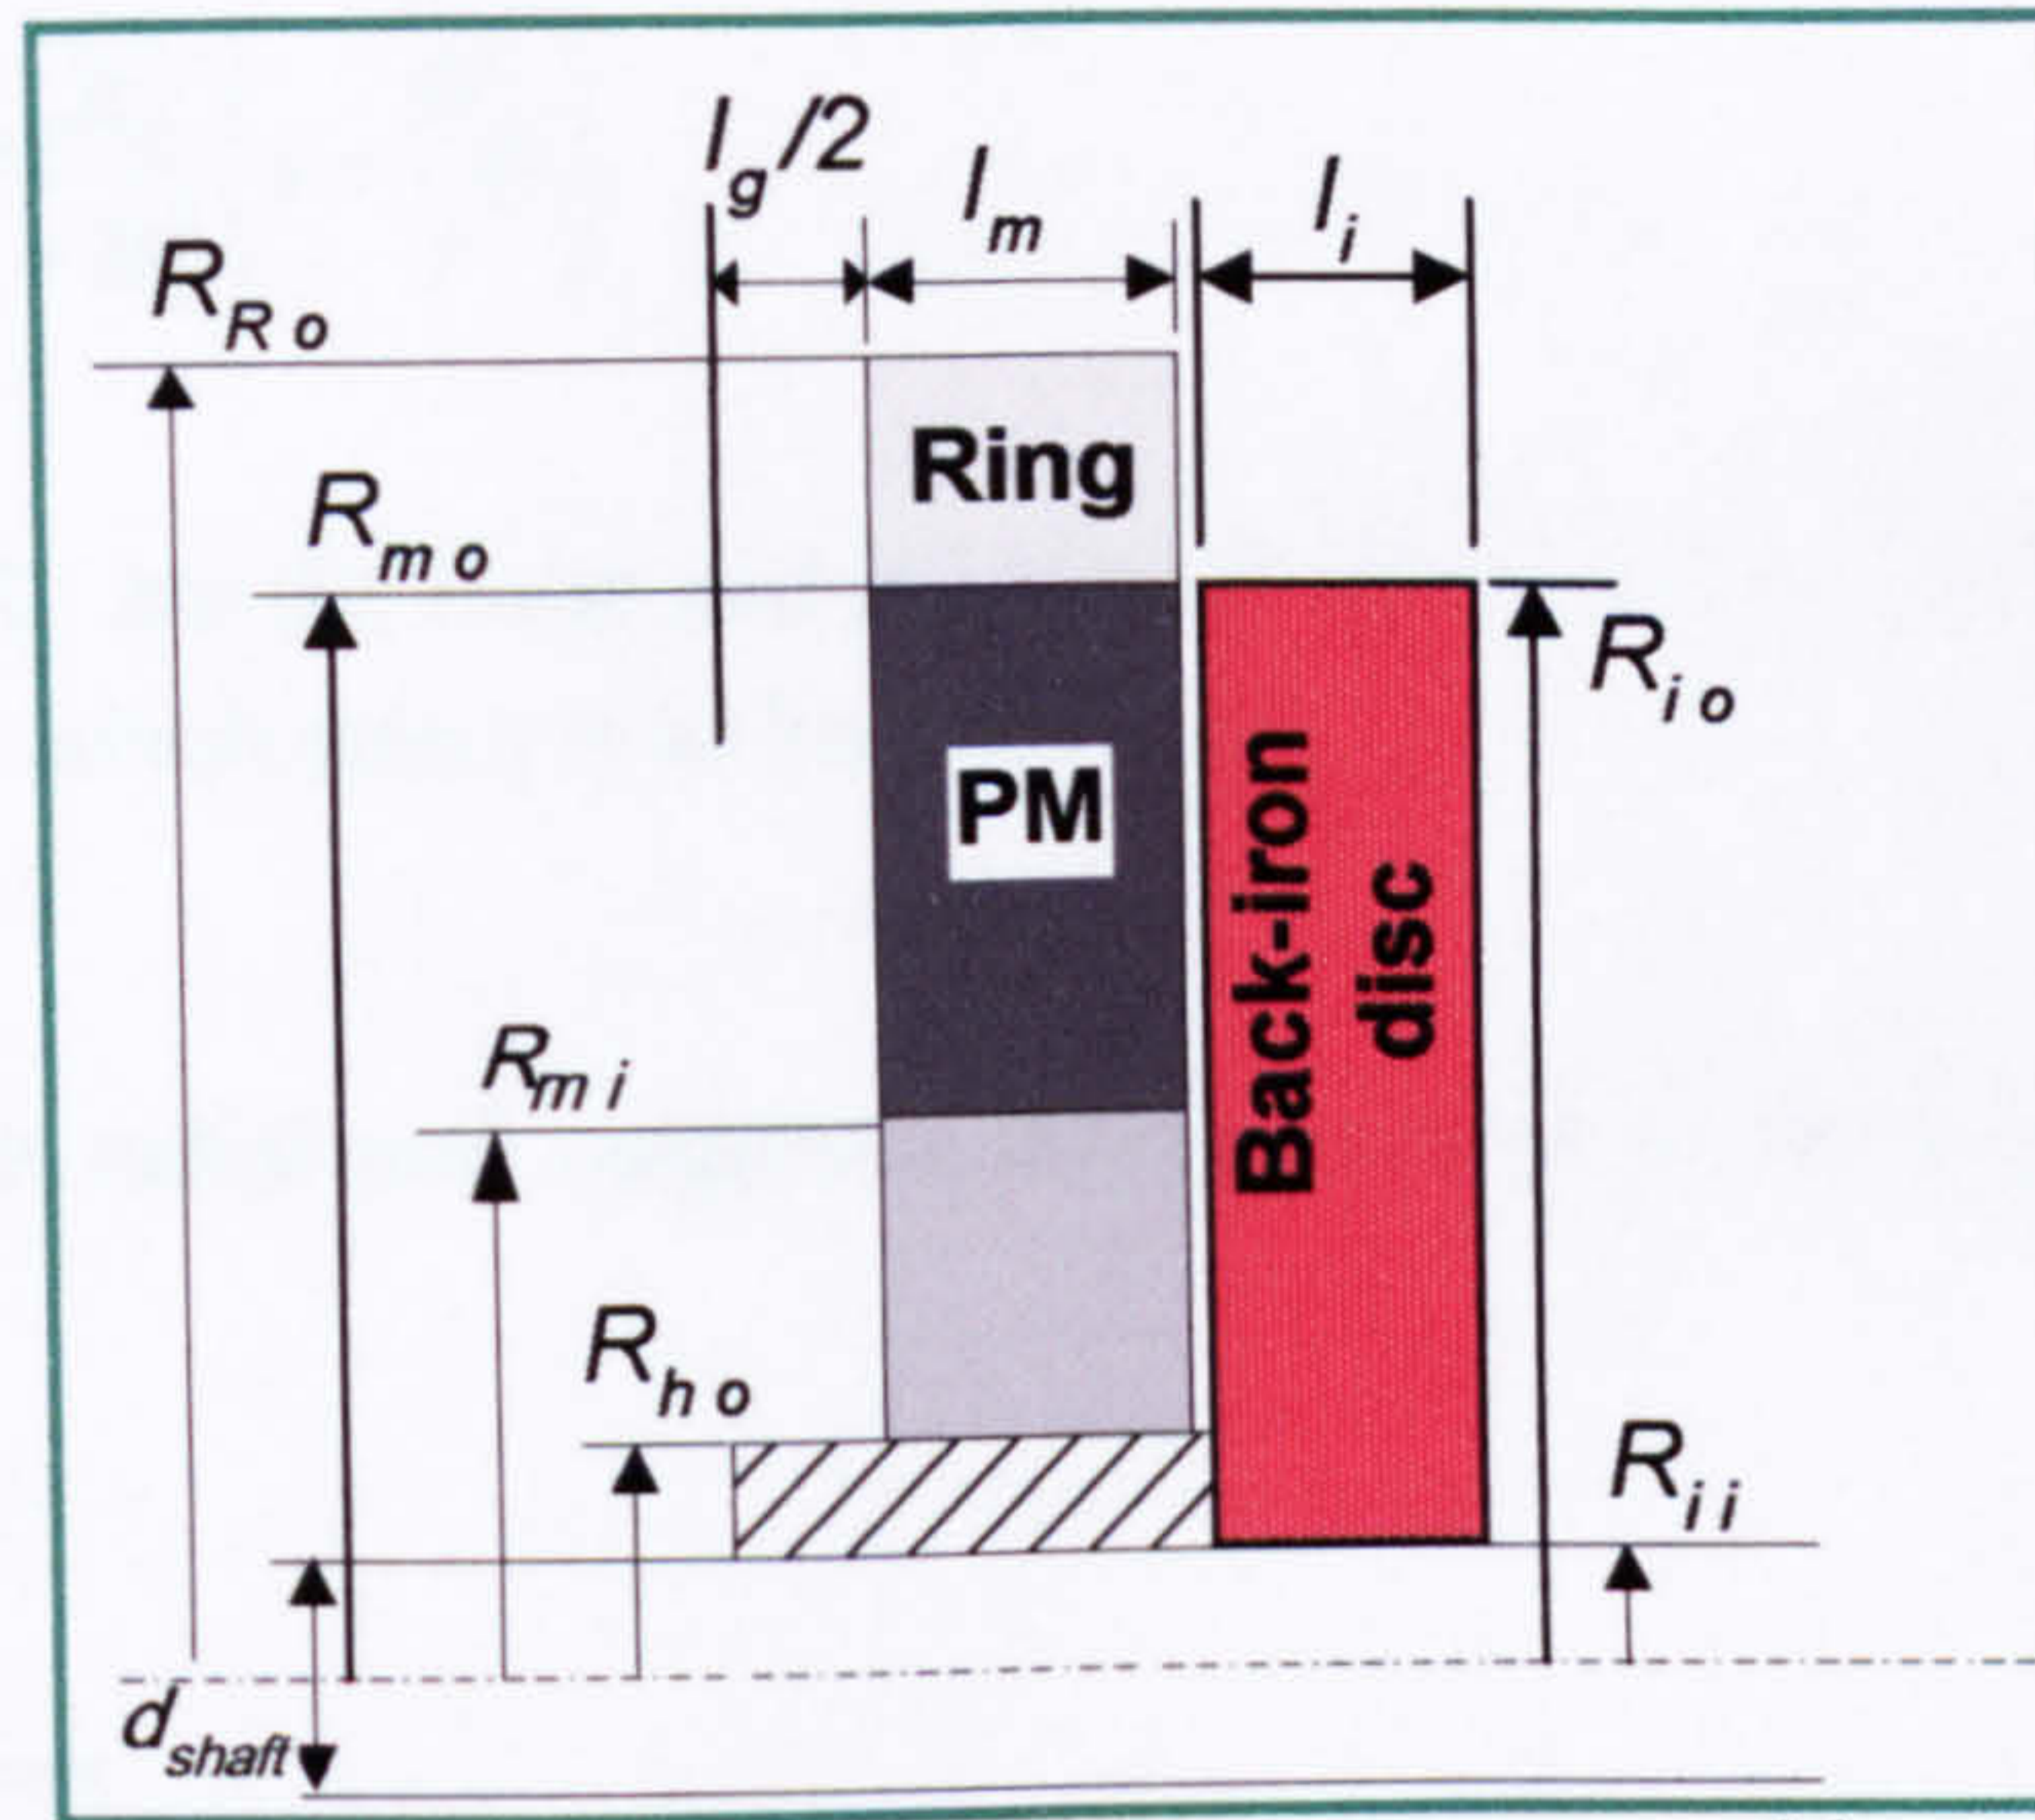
Simplified view of the magnet rotor assembly and back-iron disc
